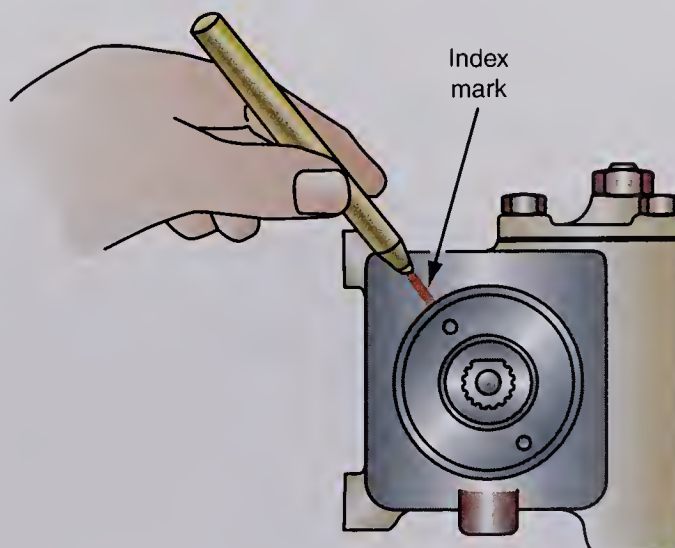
Placing index mark on steering gear housing opposite one of the adjuster plug holes.
